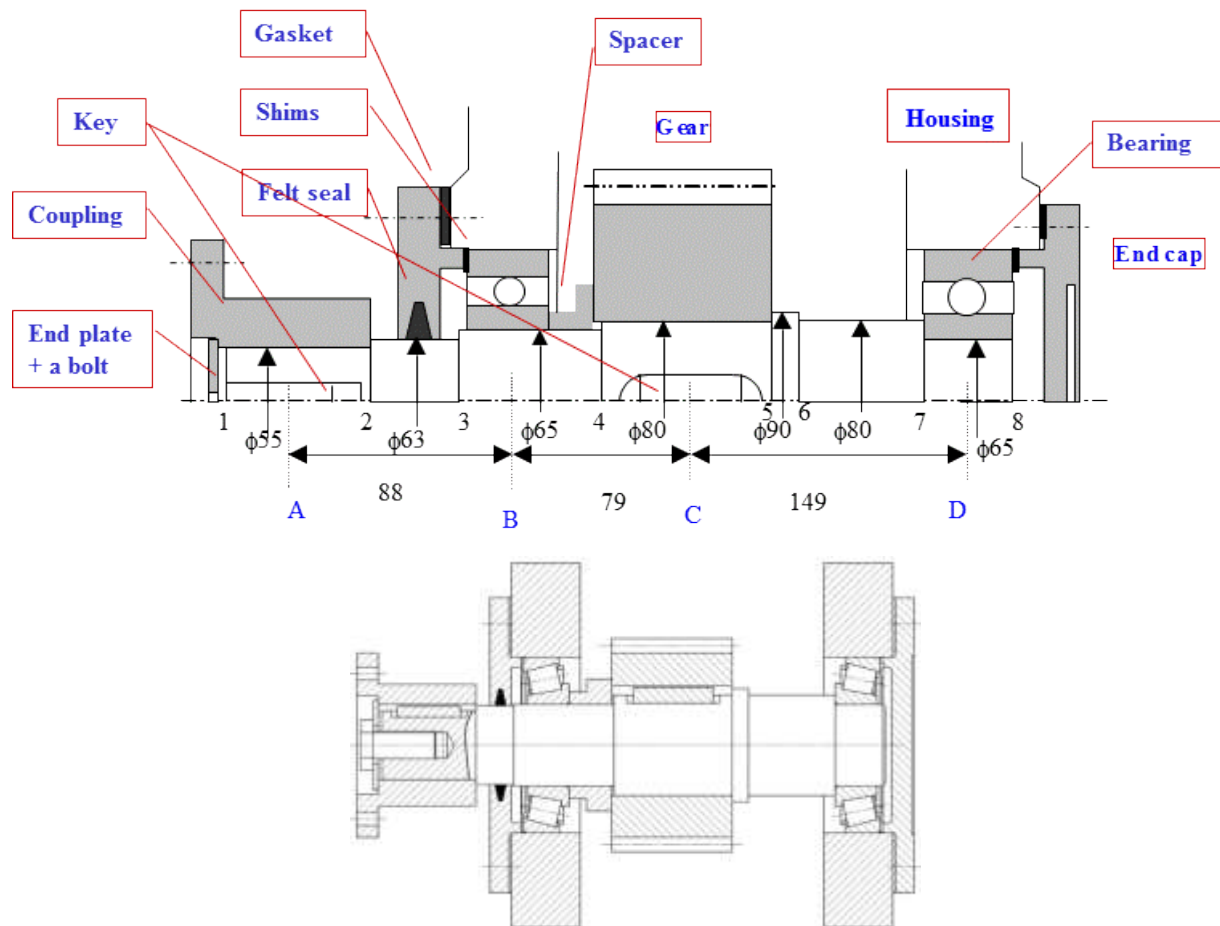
Shaft assemblies; the far left parts are half couplings.
